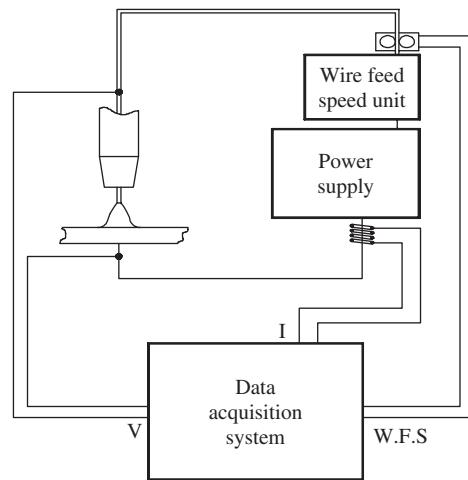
Scheme of the welding monitoring system [2], which illustrates the torch, the arc welding, the power supply and wire feed speed (e.g. welding machine) and the data acquisition system, which acquires the arc voltage, current intensity and wire feed speed during welding.
